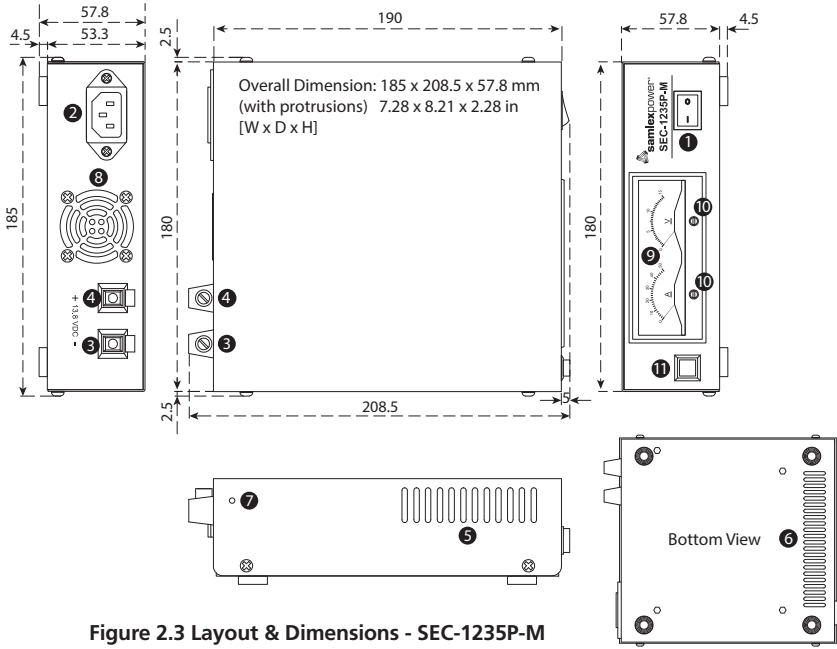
Layout & Dimensions - SEC-1235P-M
